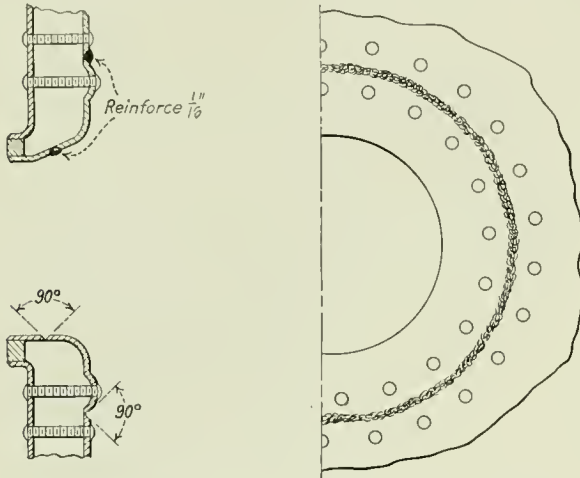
Butt Welded Fire Door Patch; Gas or Electric
